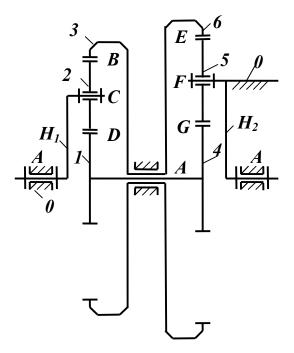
The closed differential mechanism which is transformed in a gear adaptive mechanism
